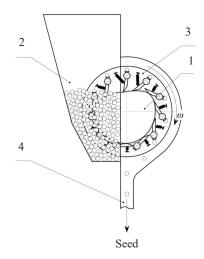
Schematic of sowing pneumomechanical unit with a dispenser of targeted action (side view): 1 — fixed copier; 2 — seed chamber; 3 — sowing disk; 4 — seed pipeline
